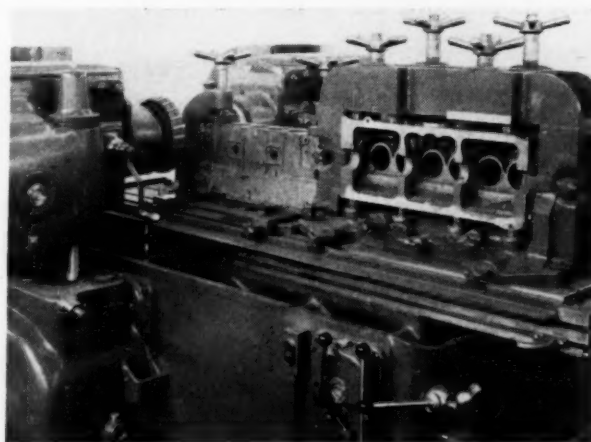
LOW-PRODUCTION SETUP FOR DUPLEX MILLING TOP, BOTTOM, AND MANIFOLD SIDES ON CYLINDER BLOCK
